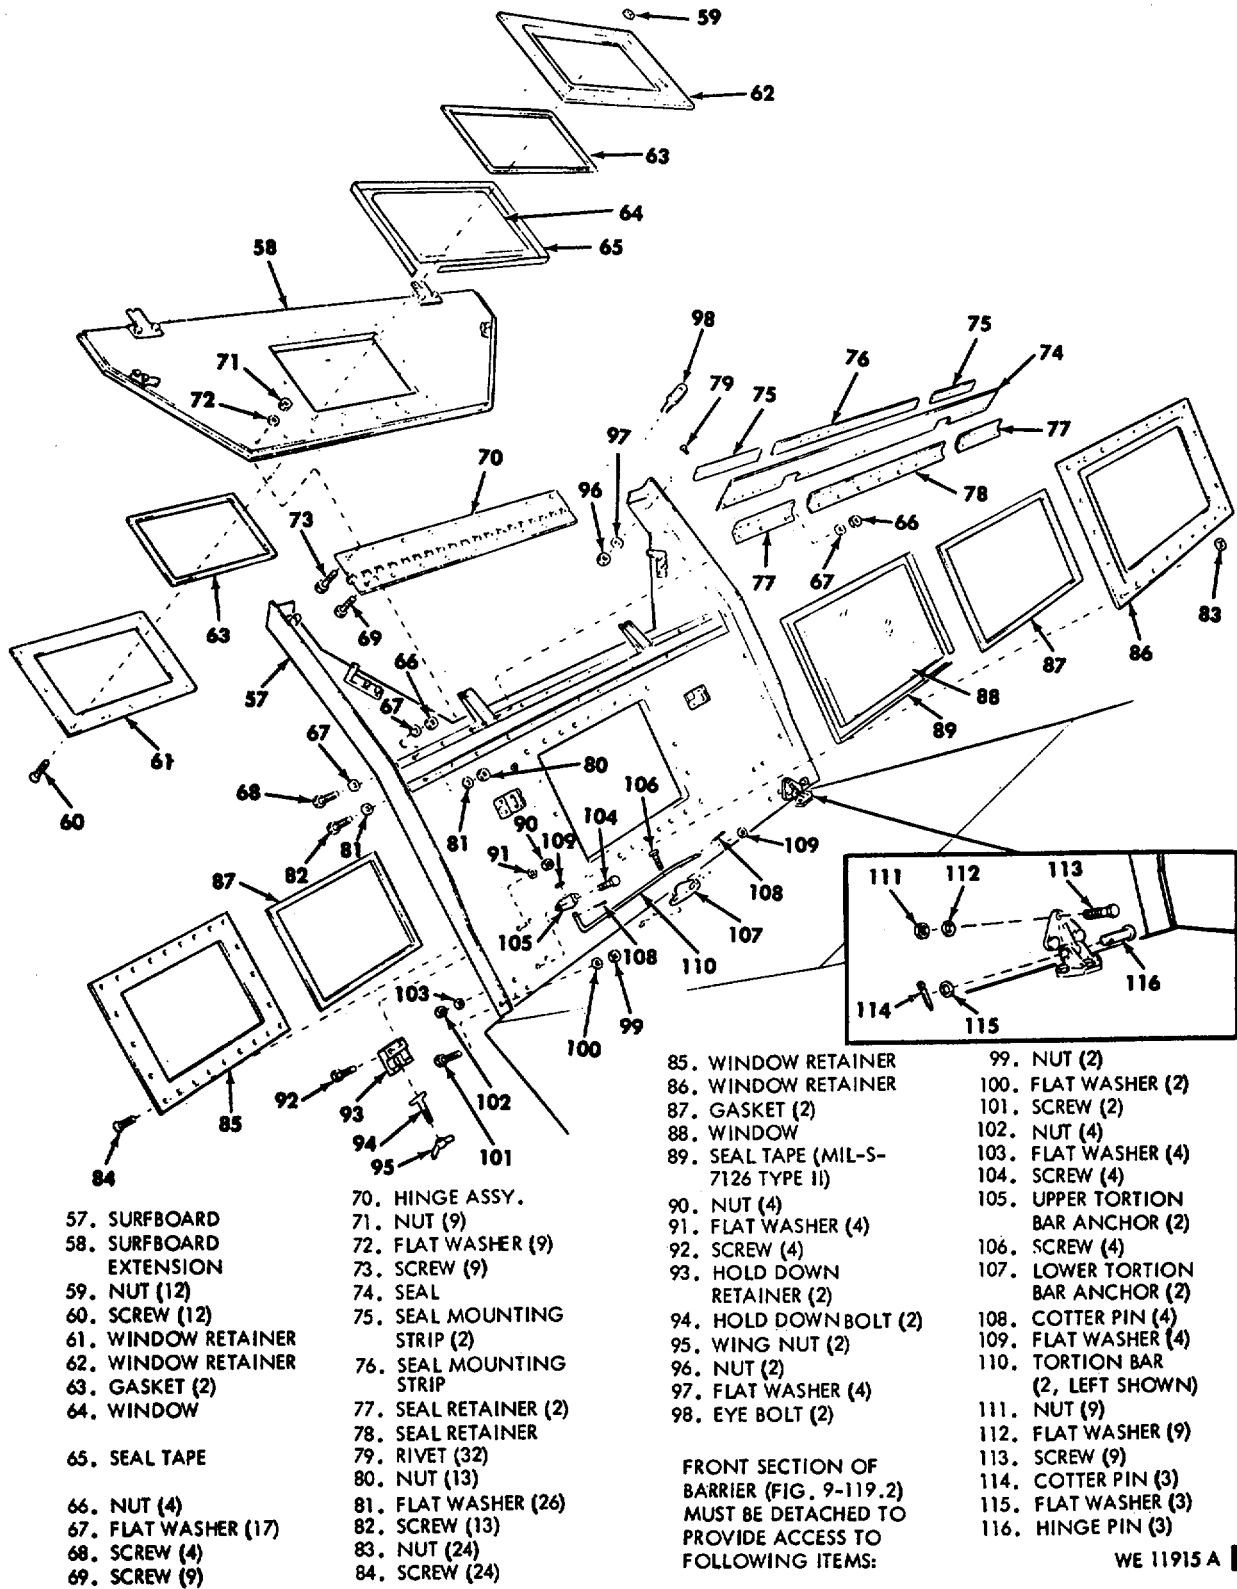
(Superseded) Disassembly/repair/assembly - surfboard and barriers (3 of 3) (effective vehicle serial no. 70)
